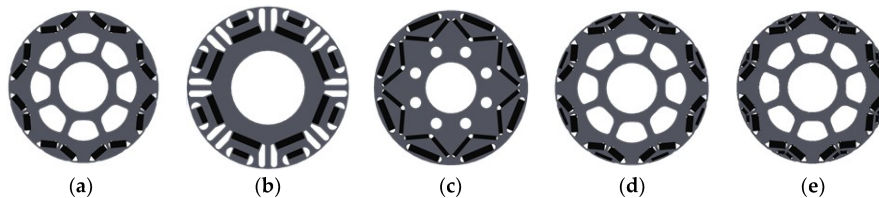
Five different shapes of IPM rotors: (a) V shape from manufacturer T; (b) double magnet shape from manufacturer V; (c) delta shape with a bar magnet in a V shape; and (d,e) improved shapes using a delta shape and a double V shape, respectively. [3]
